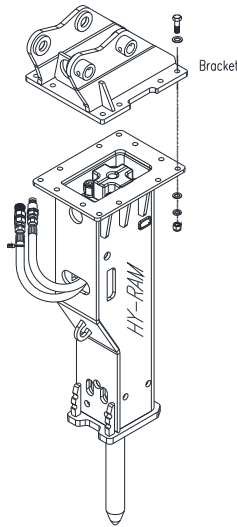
Housing Box, Mounting Bracket & Bolt Set
